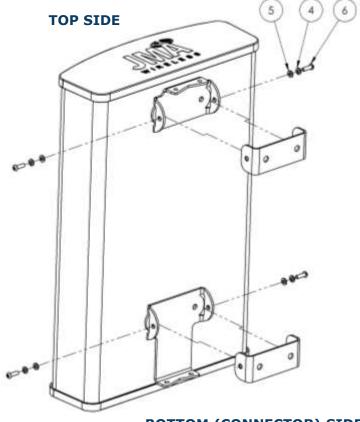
WALL MOUNT BRACKETS, DX10 assembled to a wall.
